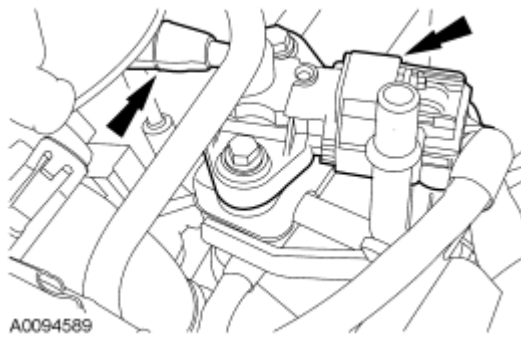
Locating Fuel Rail Pressure, Temperature Sensor Vacuum Tube & Electrical Connector
